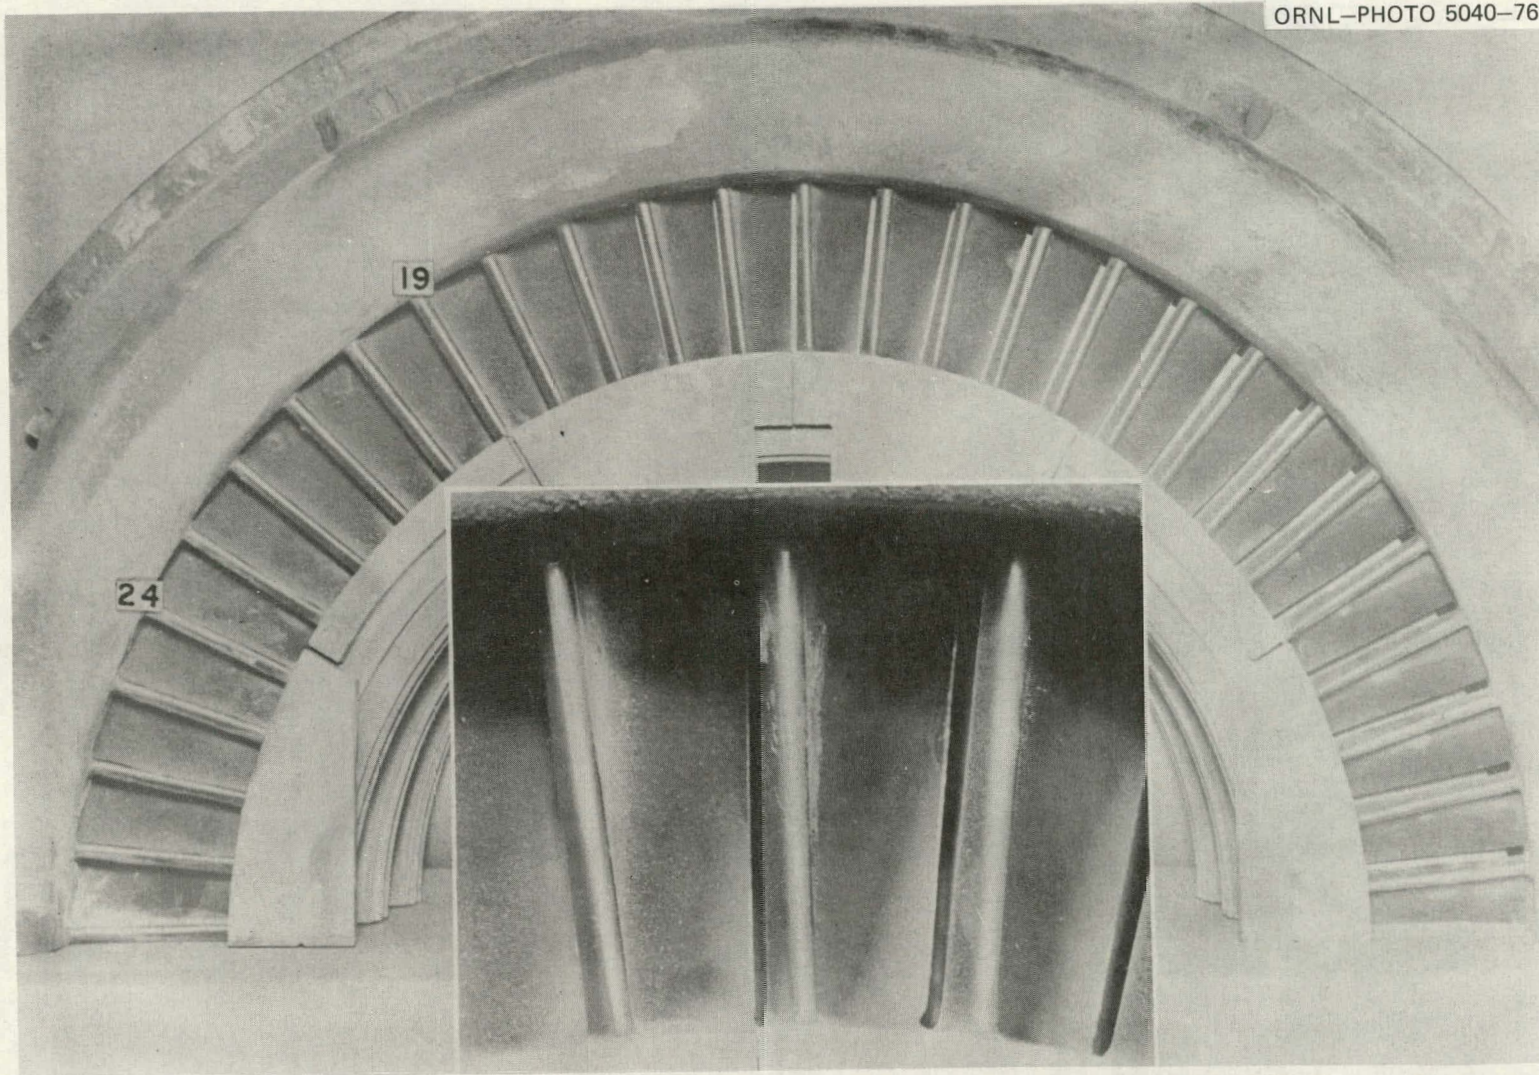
Front view of first-row stator blades. Insert shows closeup of blades at 12 o'clock (Ref. 23).
